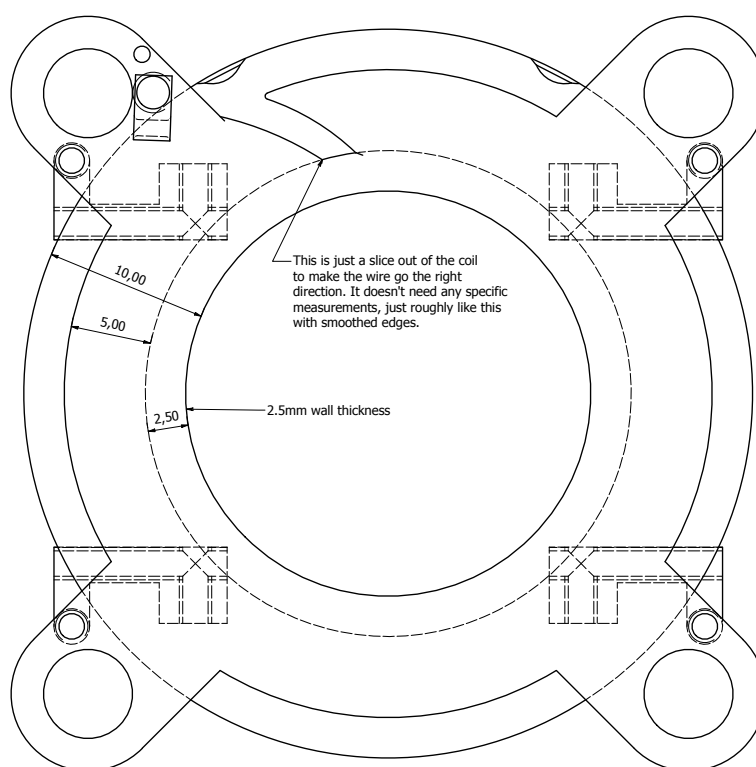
Similar schematic of the upper coil former revealing inner measurements.
